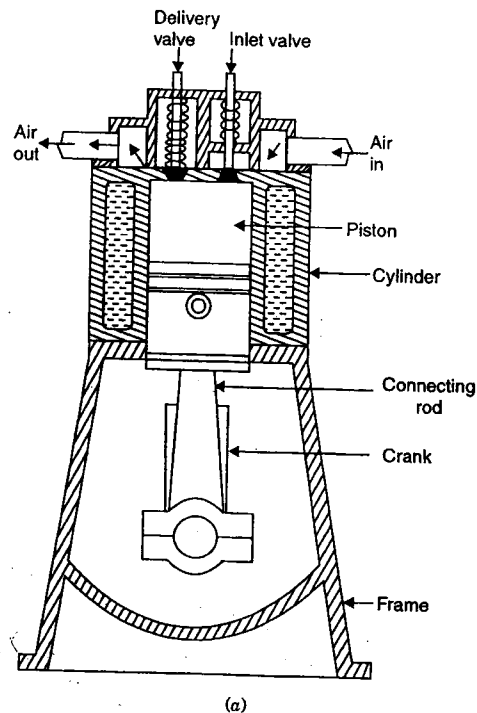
(a) Sectional view of a single-stage reciprocating compressor.
